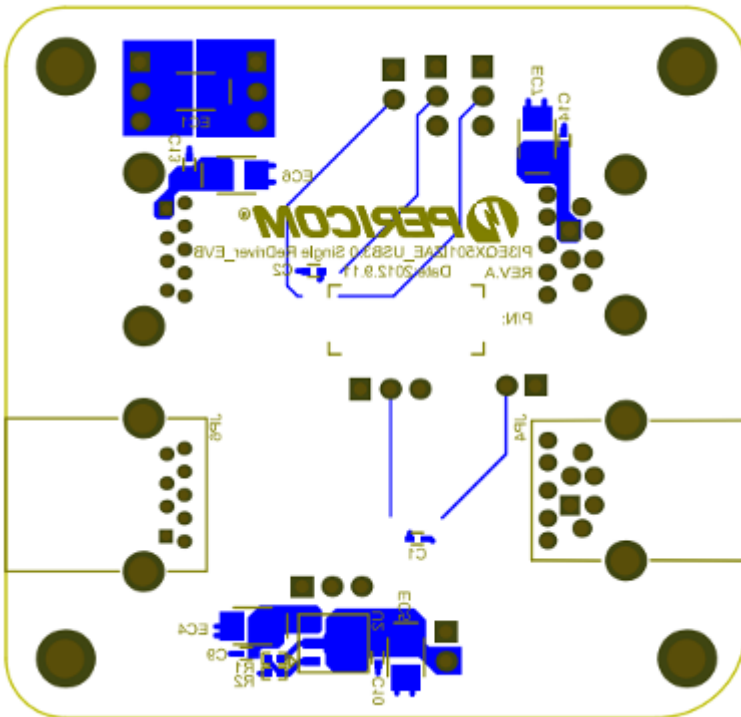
, Bottom view of PI3EQX501(I) EVB Layout
